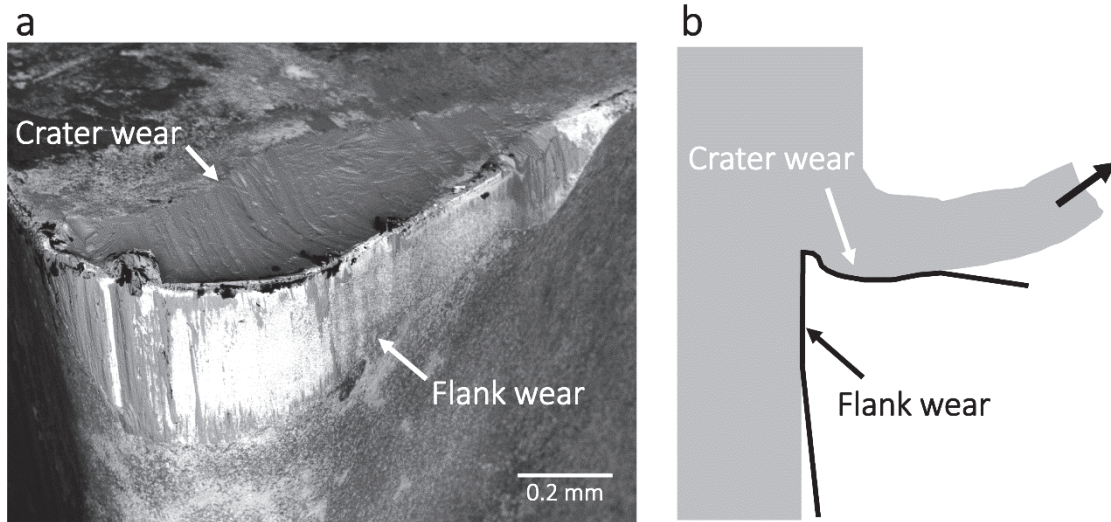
Commonly observed wear forms in metal cutting: (a) SEM micrograph of a worn cutting edge exhibiting crater and flank wear. (b) Illustration of crater and flank wear on worn cutting tool in cross-section.
